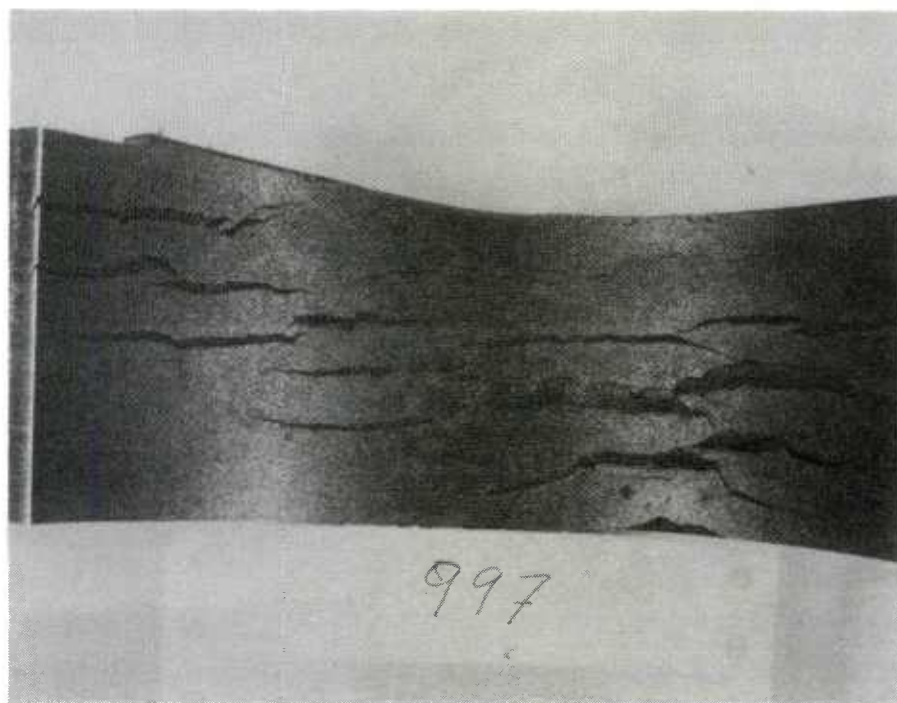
"Cold Tear" defect near open end of forging.
